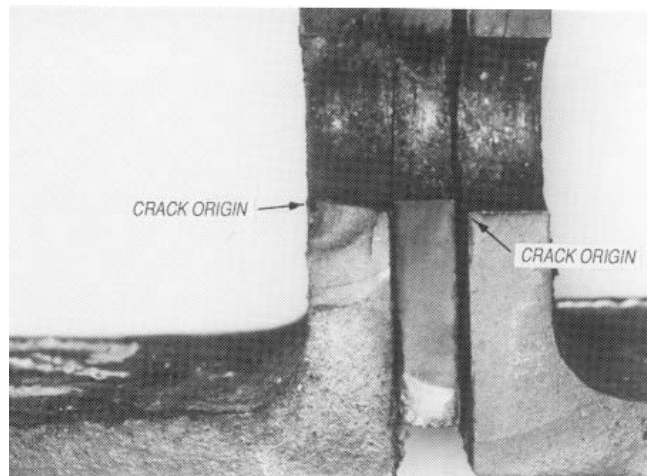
Crack surface at the edge of rivet hole
